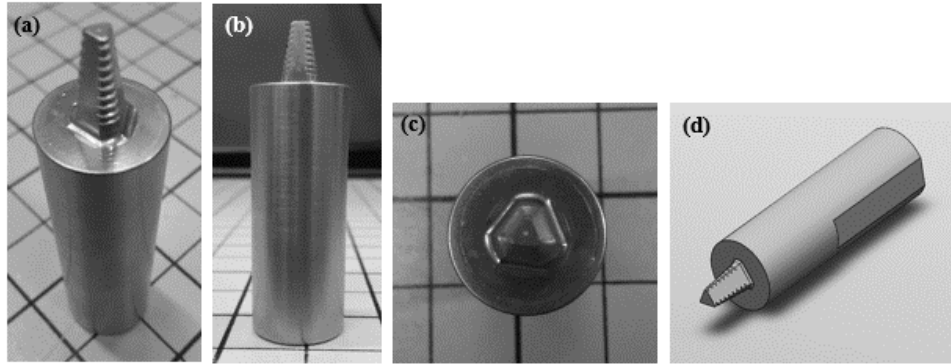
(a) Isometric view, (b) side view, (c) top view and (d) schematic view of the typical aligned FSW tool.
